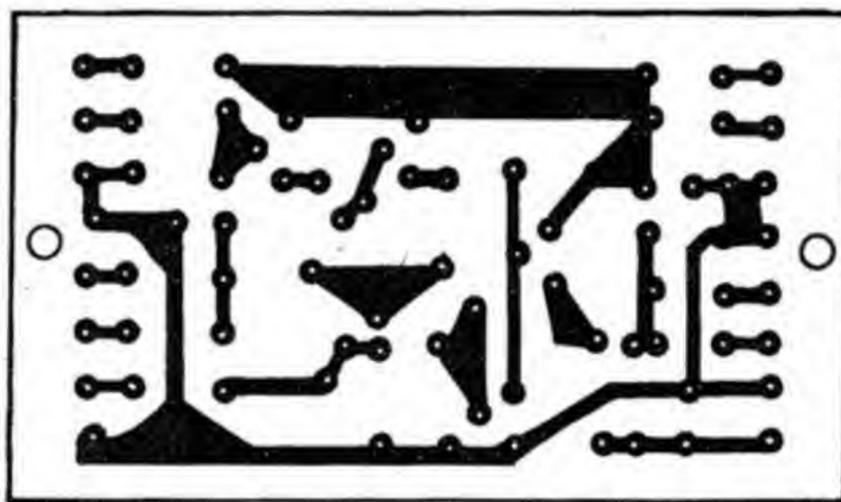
Actual-size PCB layout for the circuit shown in Fig. 1.
